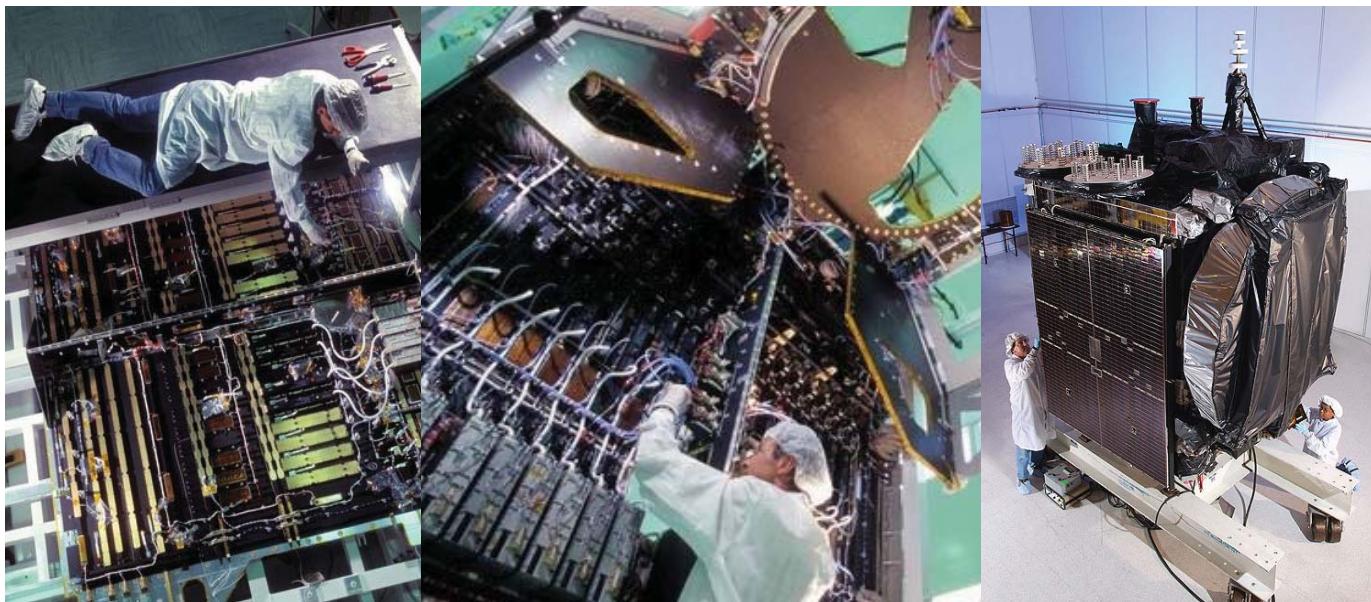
A CTO Spacecraft would reduce resources spent in Assembly, Integration and Tests..
